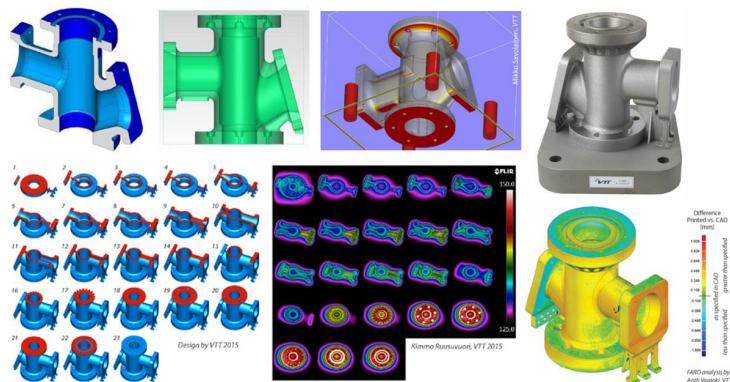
Images of test component CAD geometry, thermal imaging during printing, final printed component, and FARO geometric accuracy measurement.
